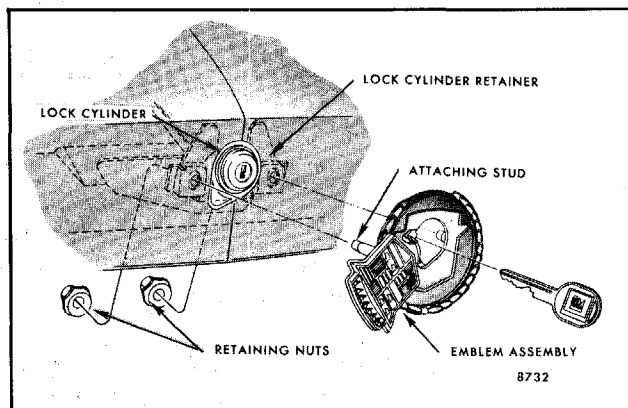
Rear Compartment Lock Cylinder Emblem "K-69"
